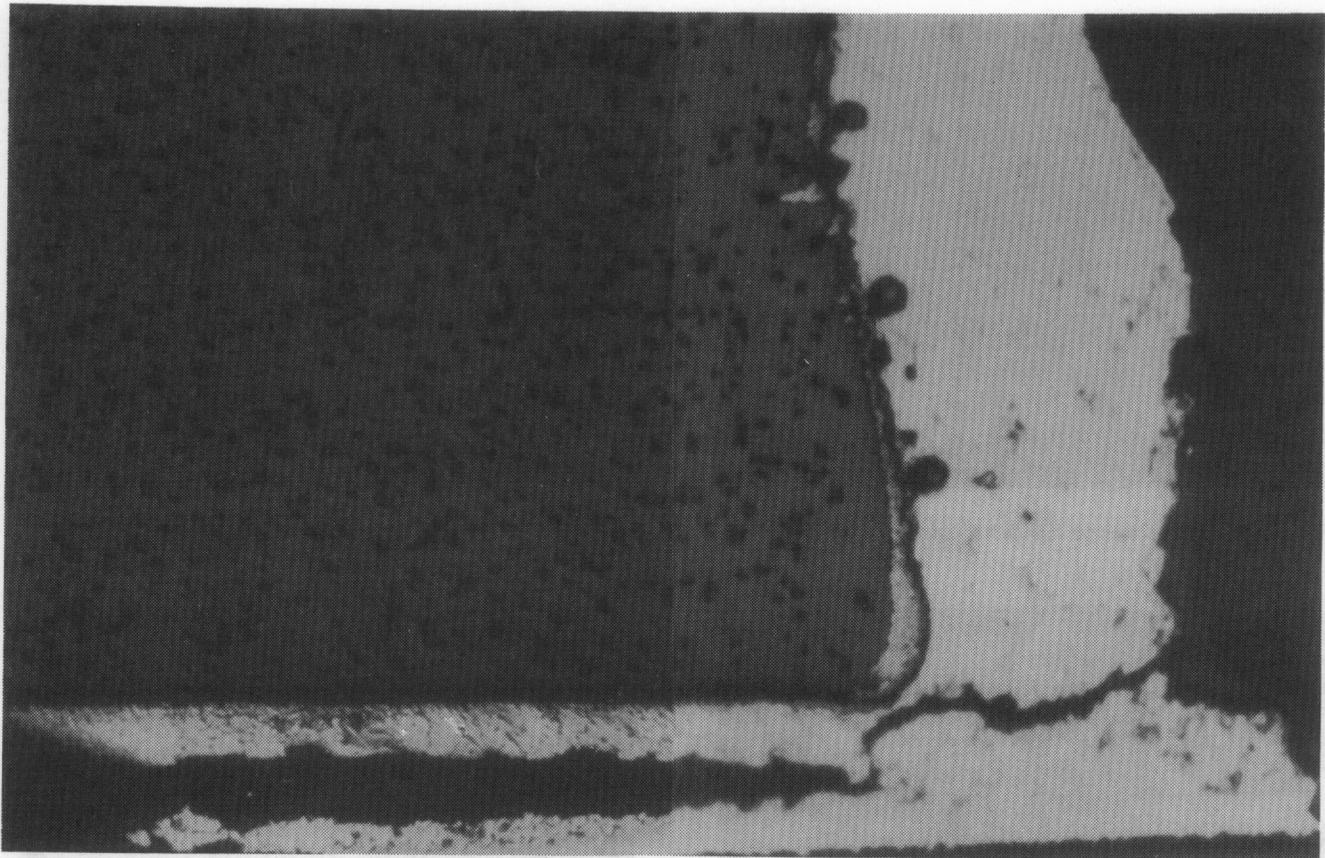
Cracked Solder Joints on 100-Pin LCC
